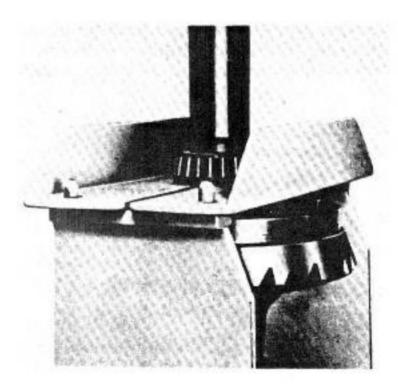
Setup for pressing tapered-roller bearings off differential housing and cover.
